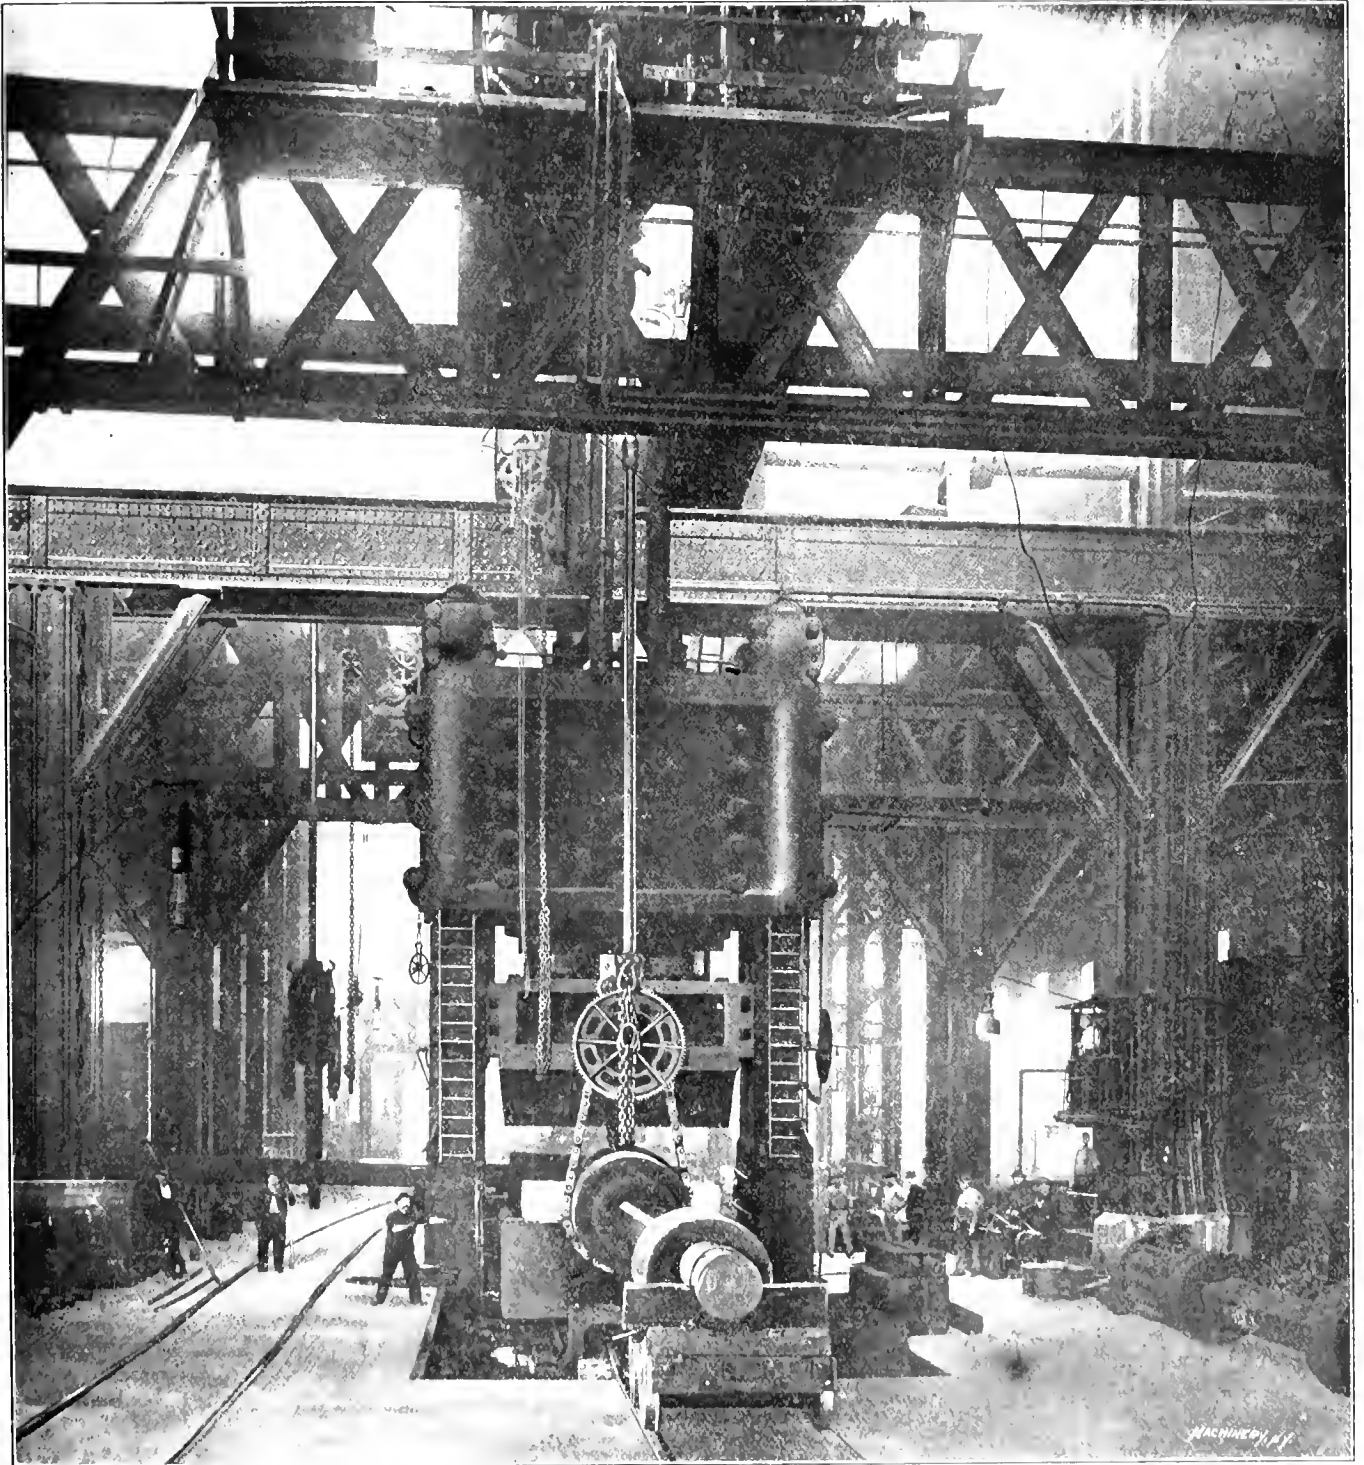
An Ingot being worked to shape beneath the 16,000-ton Press of the Bethlehem Steel Co.
